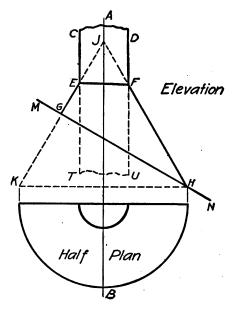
Half Plan and Elevation of a Flaring Roof Collar.
